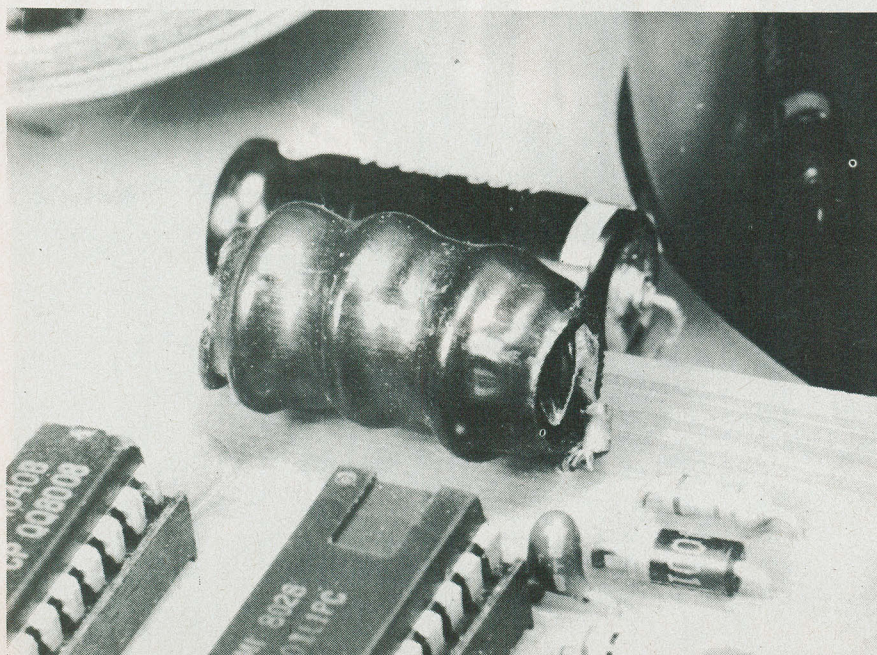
BATTERIES B9-B11 should be button-cell types with solder lugs. Those batteries can then be soldered together, covered with heat-shrink tubing, and mounted directly on board 1 as shown.
